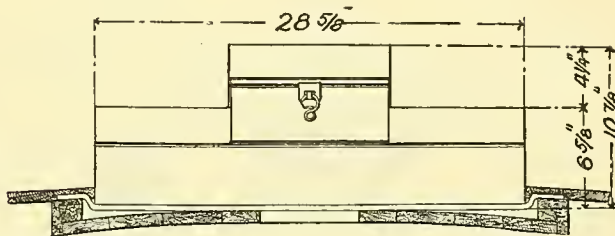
END VIEW OF CARBURETOR IN MANTLE.
